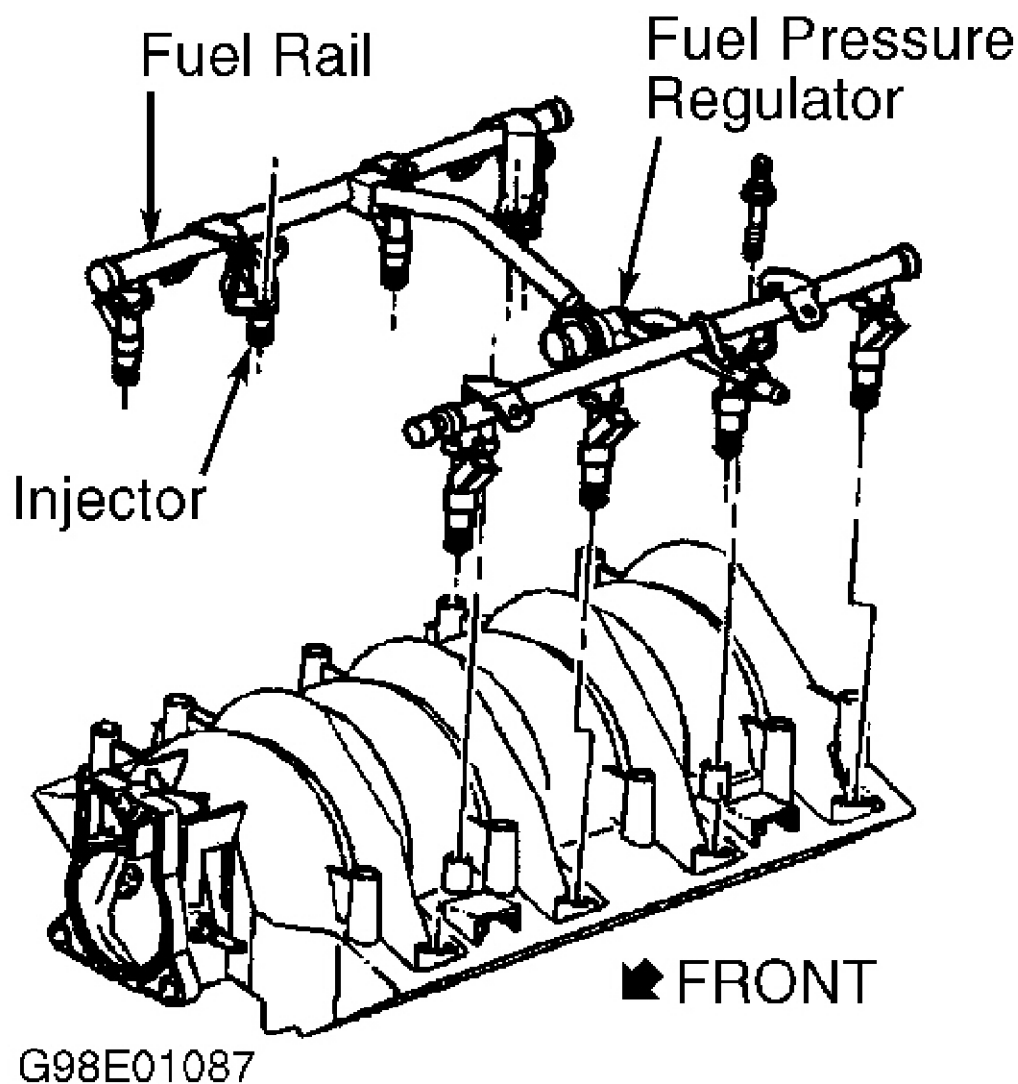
Locating Fuel Rail Assembly Components (5.7L)
